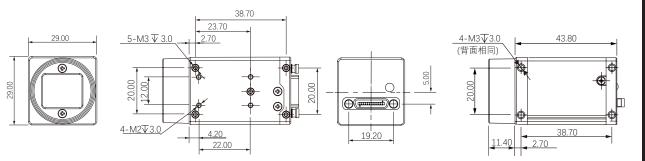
Mechanical Dimensions (in mm) for Cameras with 29 \* 29 \* 43.8mm housing (without 6-pin IO).
